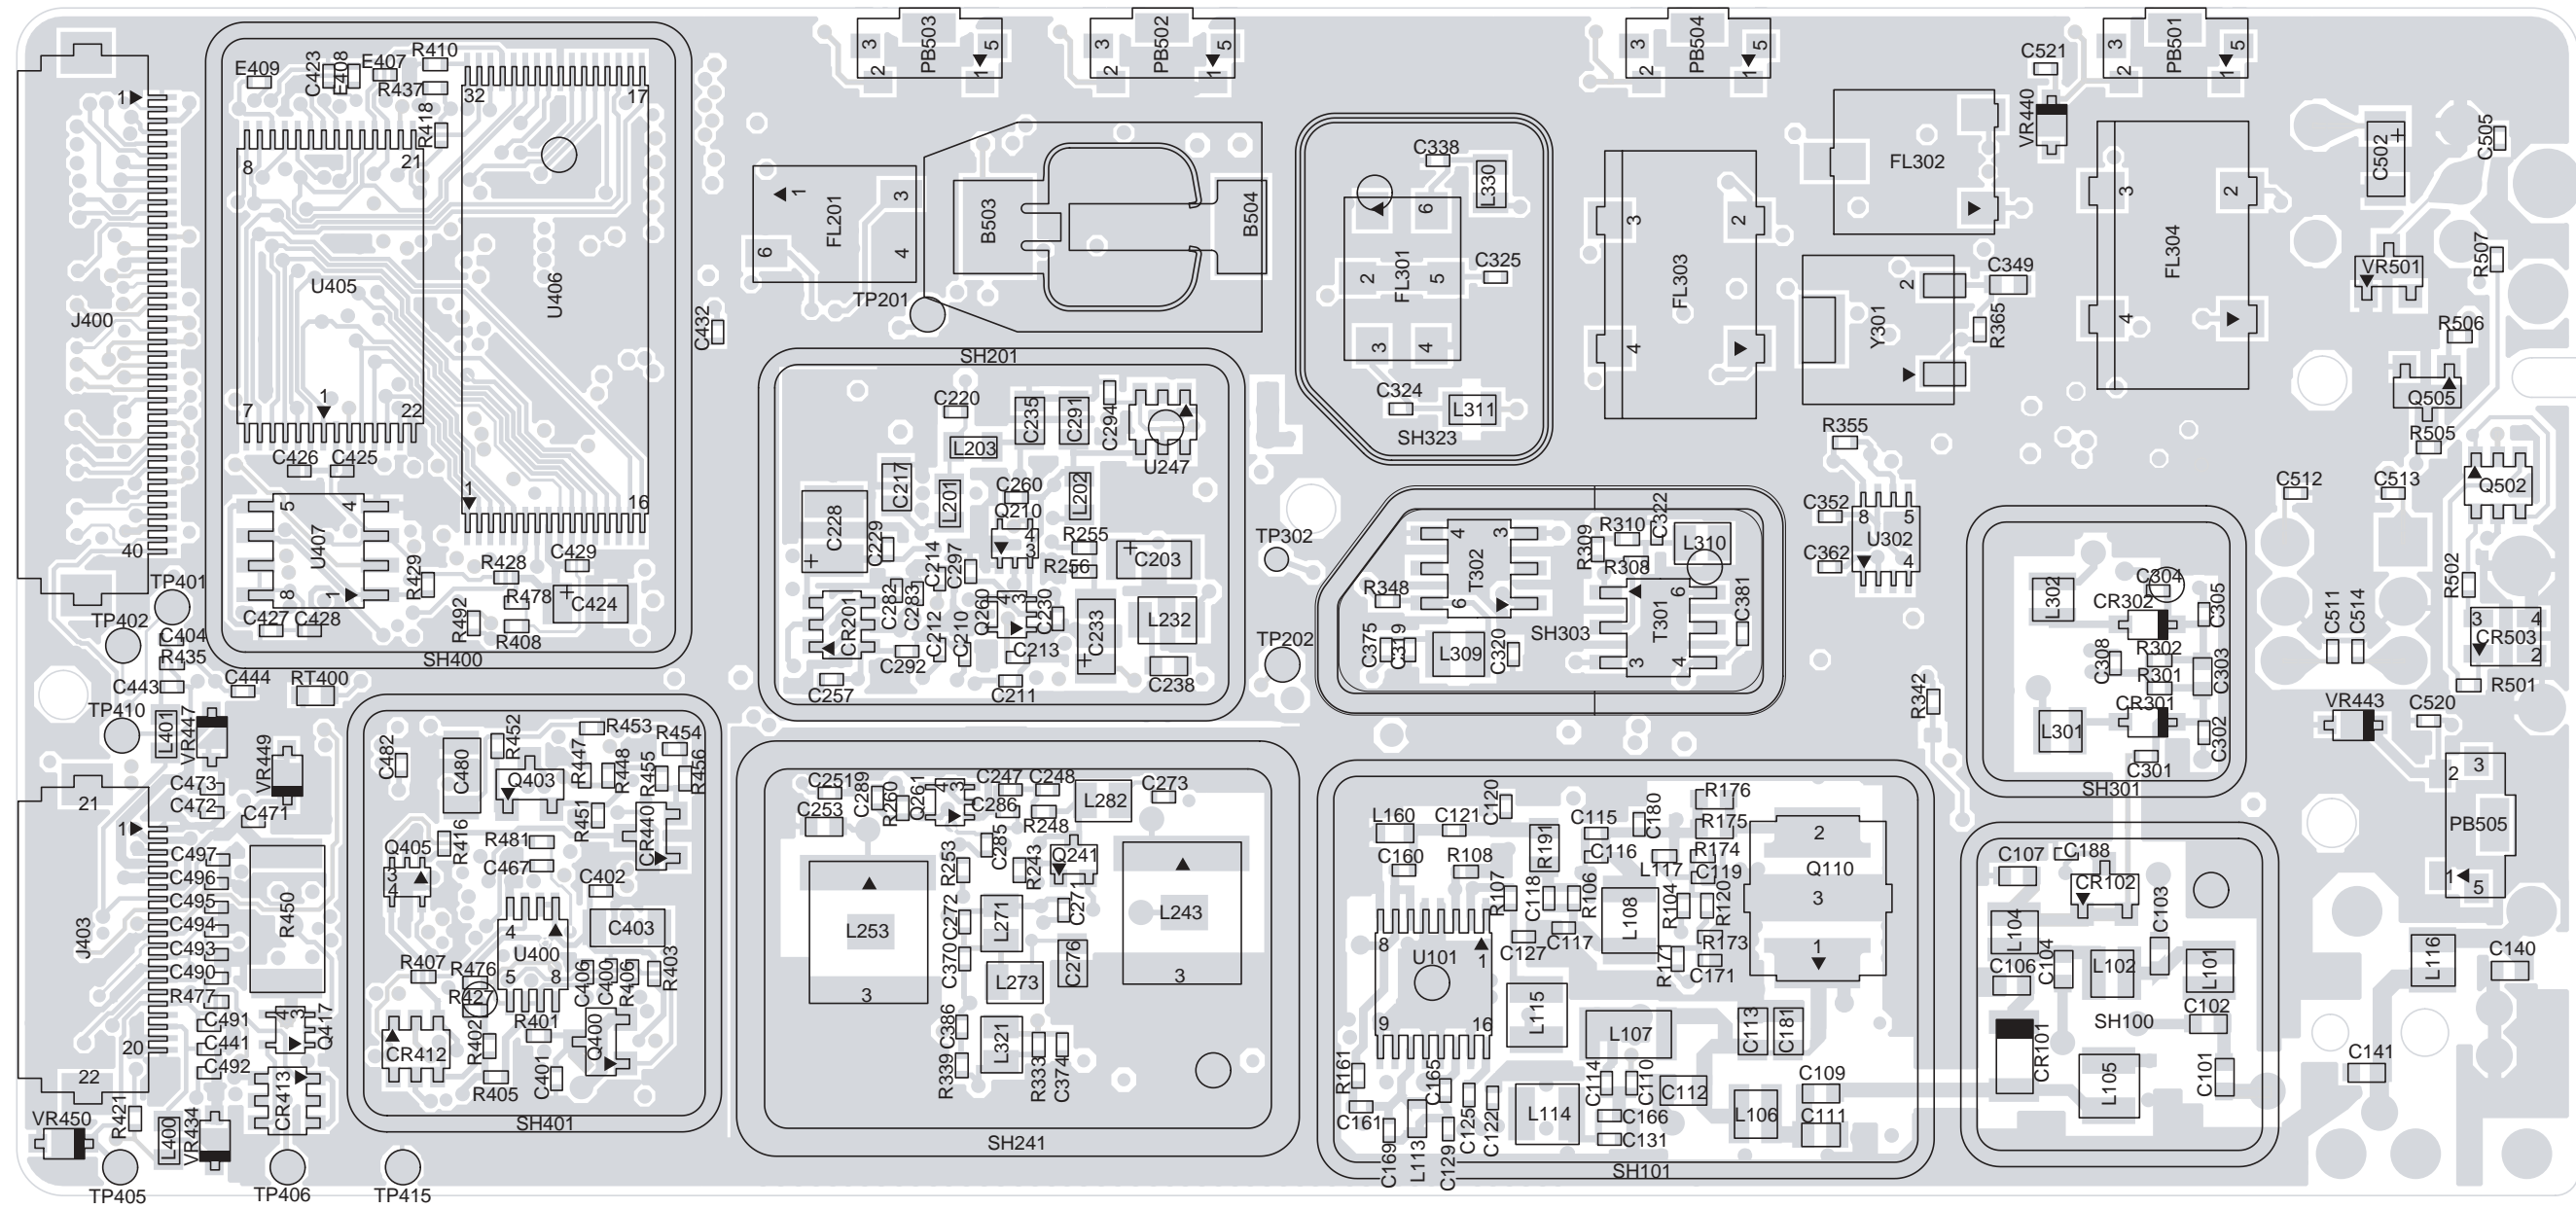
UHF (450-527 MHz) 5000/7000 Series Main Board Top Side PCB No. 8486686Z01
